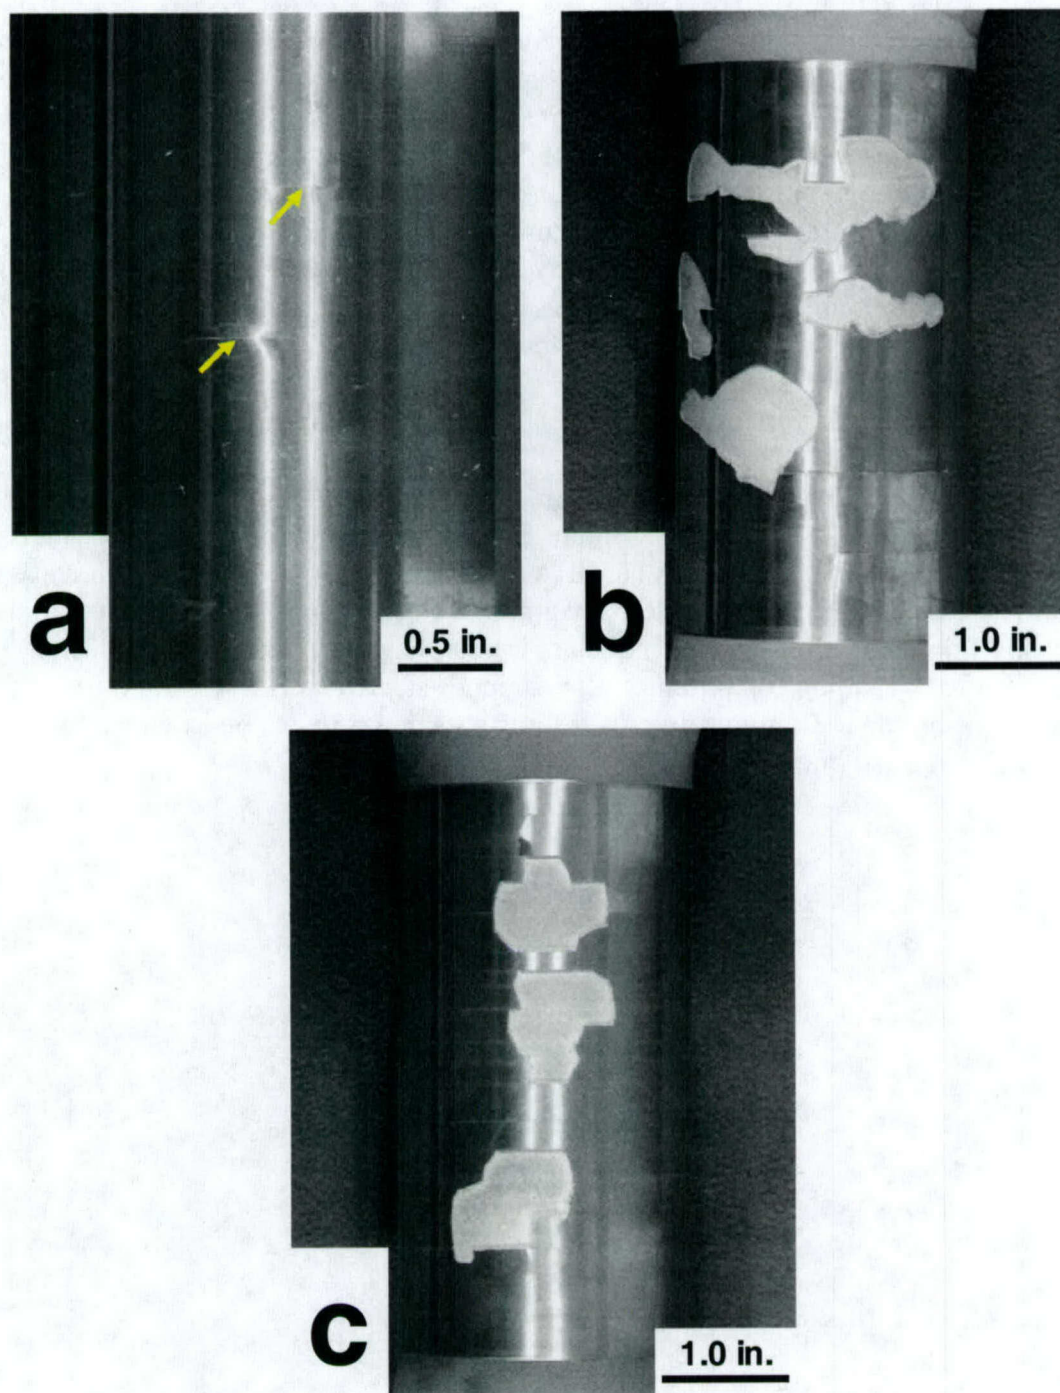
Morphology of spalling exhibited by HVOF coatings in axial fatigue tests at $R = -0.33$: (a) specimen HVOF 7 (0.006 in. coating), stepped stress test to 190 ksi; (b) specimen HVOF 14 (0.009 in. coating), stepped stress test to 180 ksi, and; (c) specimen HVOF 30 (0.01225 in. coating) tested at 160 ksi. Arrows in (a) indicate regions of localized delamination and circumferential cracking (i.e., incipient spalling) in the gage section.
